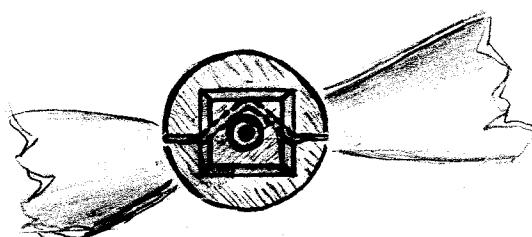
View of the back side of the nose block assembly looking forward. This view shows how the wire forming the retaining device is bent into a "Vee" to clear the prop shaft. Cut a slight groove in the Nose Block Plug so the retaining wire will fit snugly between the Nose Block and Plug when they are epoxied together.
